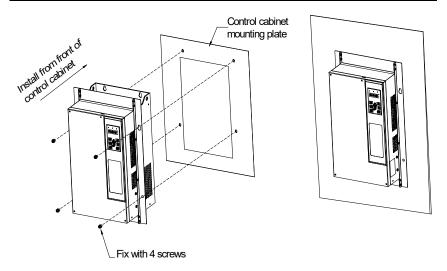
Embedded Installation Diagram of Sheet Metal Structure
